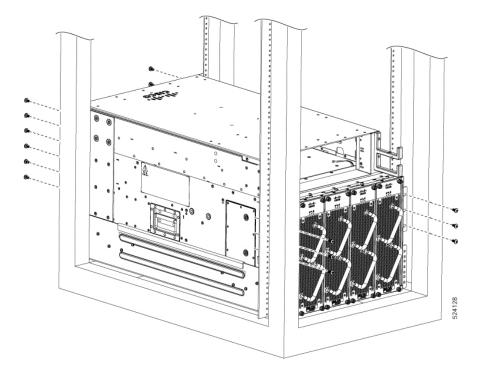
Attach 8804 Chassis to Rack - Rear Right View
